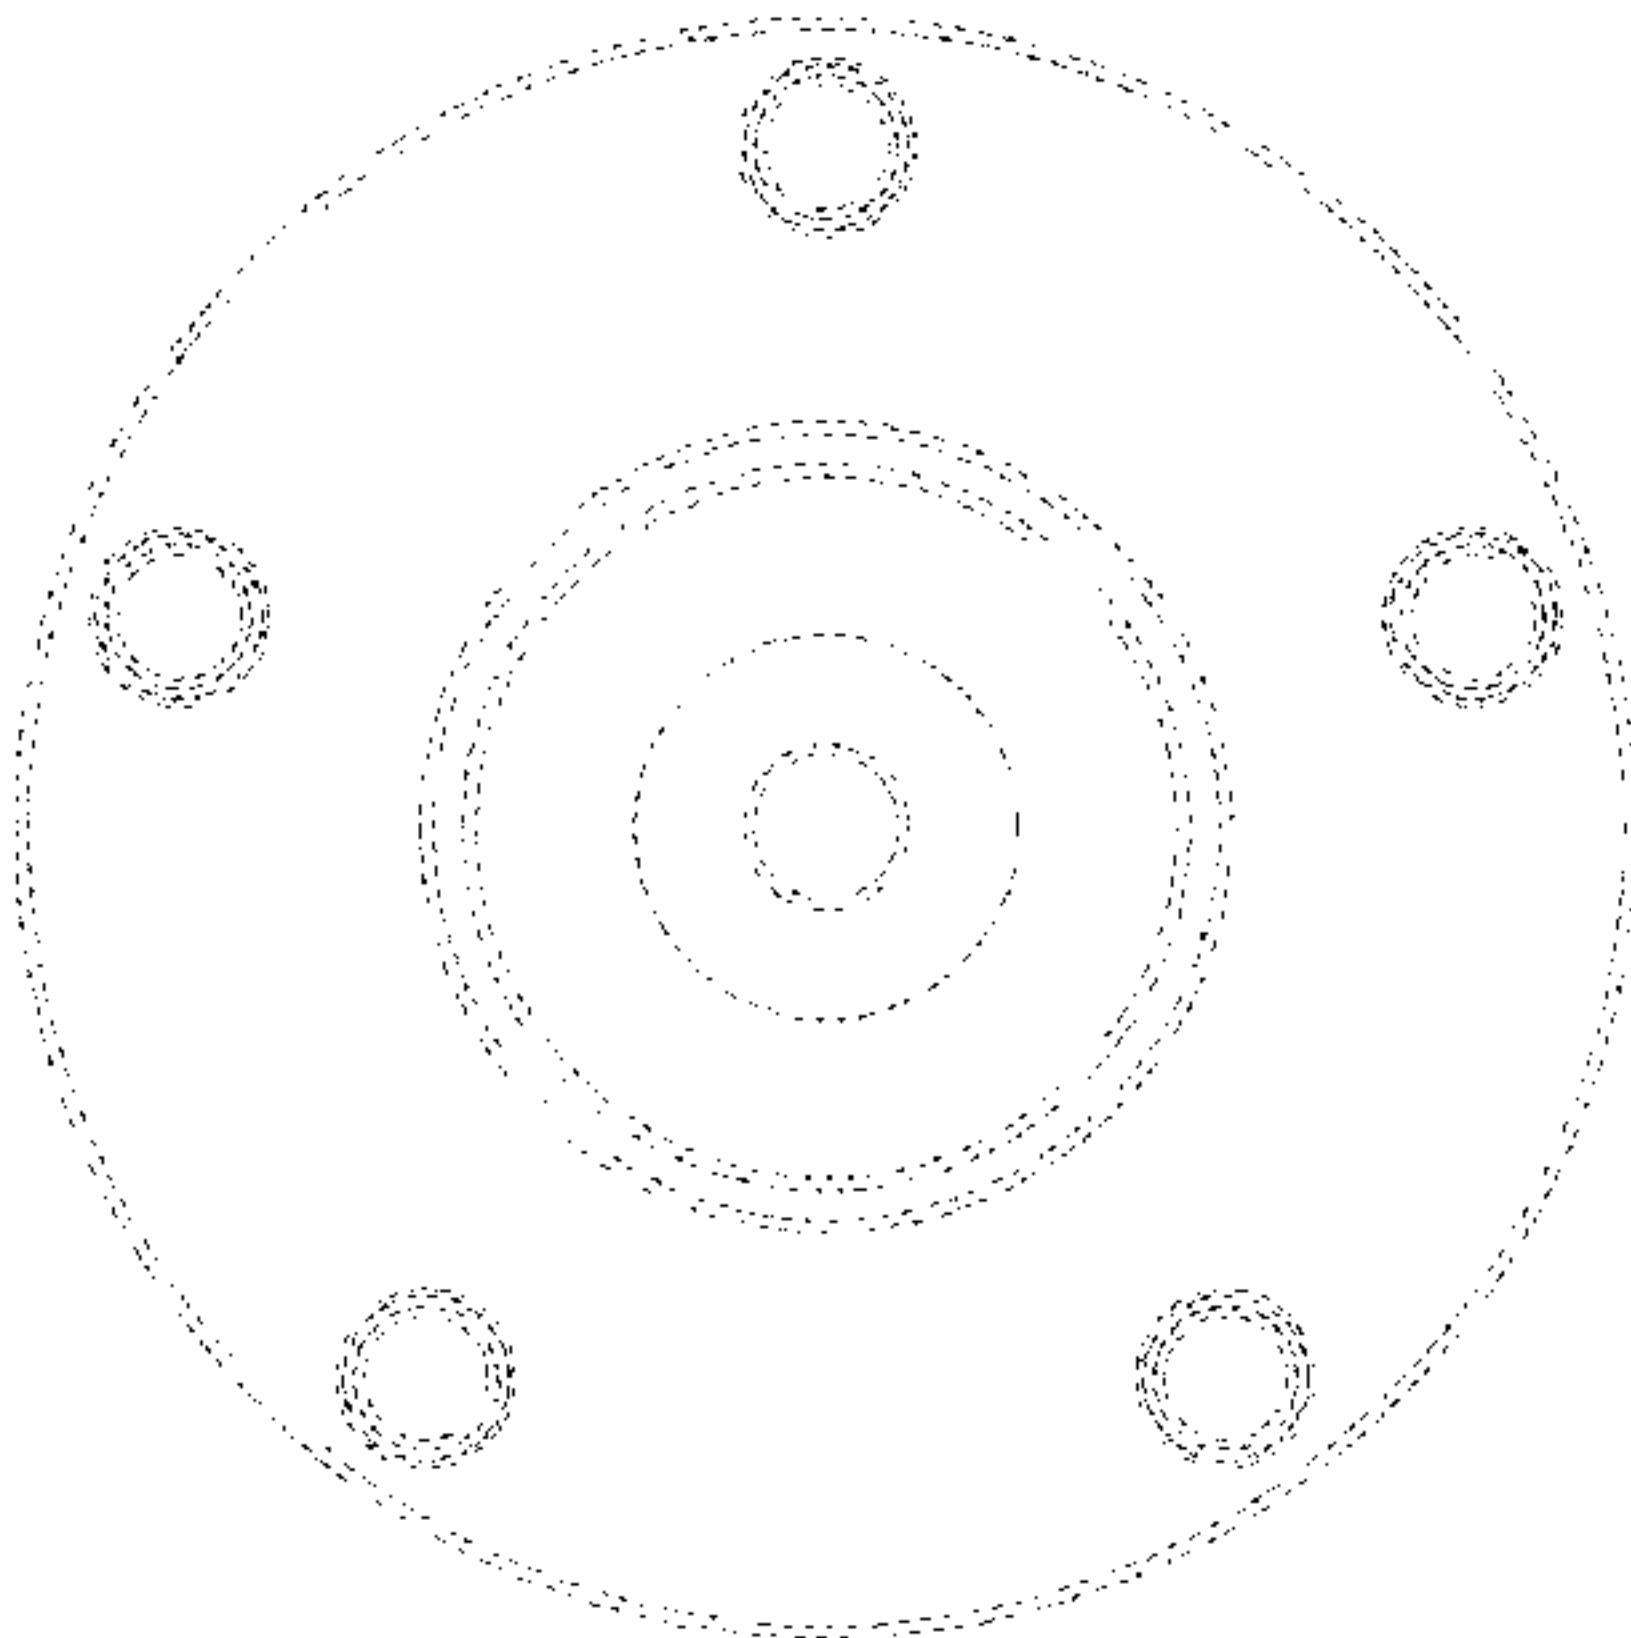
illustrates a rear view of the part of the bearing for the wheel according to the embodiment;
